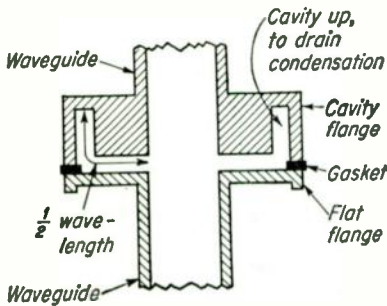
Cross-section details of a choke joint used to couple waveguide sections.
